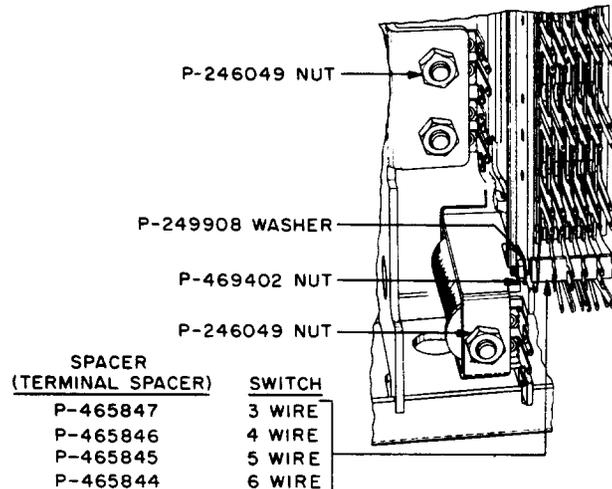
Partial Rear View of Switch Showing Magnet Mounting Part and Terminal Spacers
